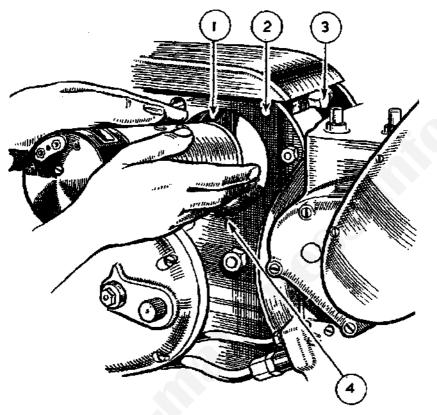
REMOVAL OF DYNAMO (SUBSEQUENT TO 1952).
